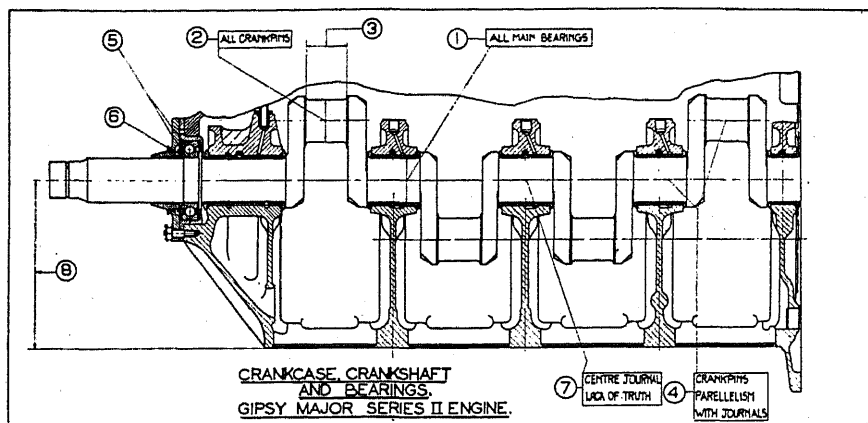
CRANKCASE, CRANKSHAFT, AND BEARINGS
